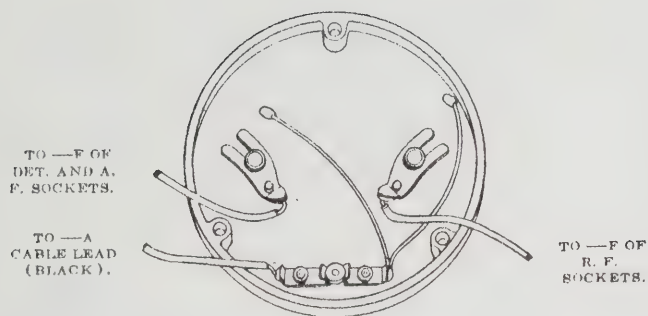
REAR VIEW OF DOUBLE RHEOSTAT AND FILAMENT SWITCH ASSEMBLY USED IN MODELS 20 (No. 4640-7570), 19 AND 21.
